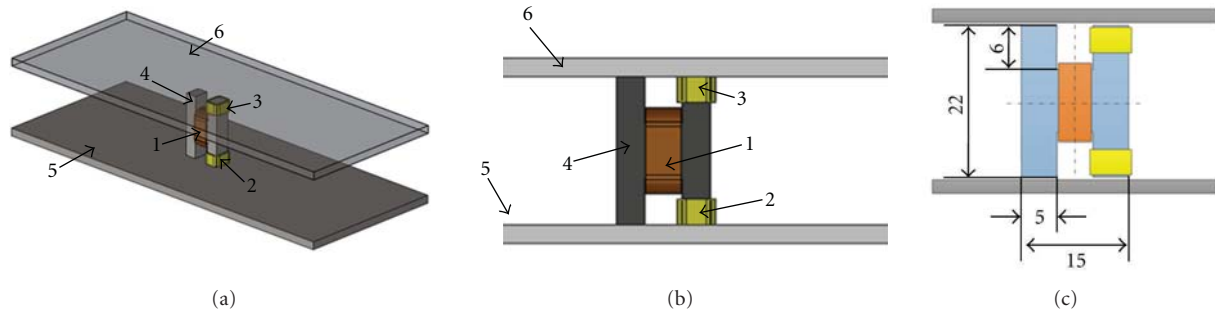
Views of the transducer: (a) three-dimensional view, (b) cross-section view, (c) view with dimensions (all given in mm); 1: excitation coil, 2: main section pick-up coil, 3: reference section pick-up coil; 4: ferrite core; 5: testing sample; 6: reference sample.
